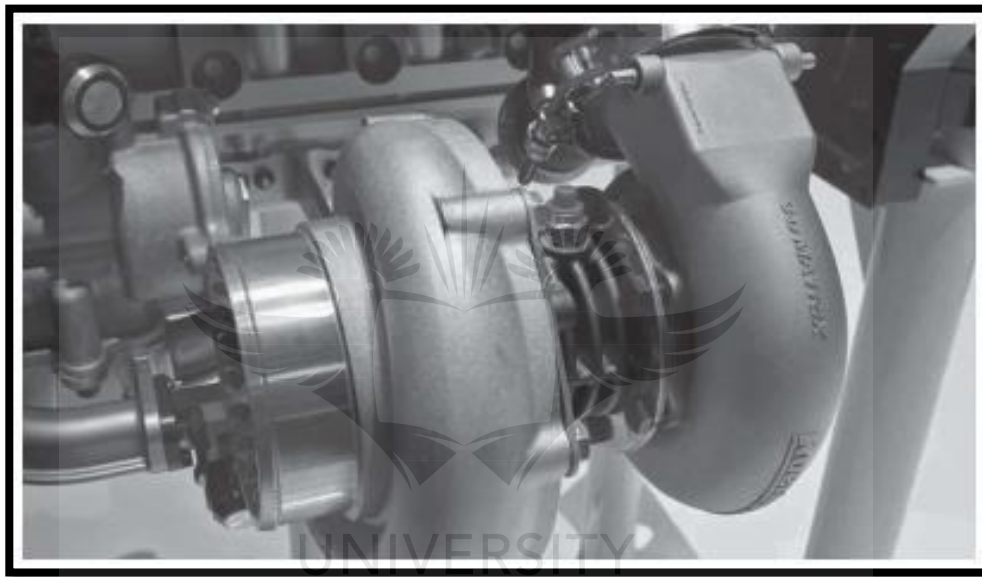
Twisted chamber turbocharger printed by SLM [34]
